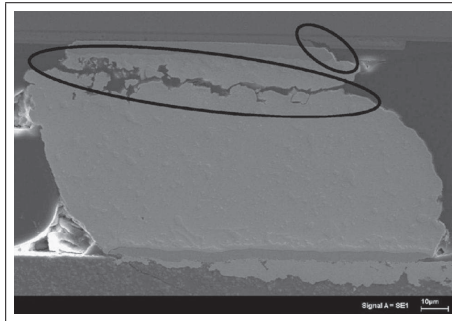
Section through a SnAgCu solder joint. Two cracks can be observed: A crack in the solder joint and a crack in the metallization layer of the flipchip [27].
